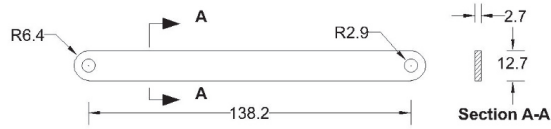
Details of Sidebars (all dimensions are in mm, steel plate gauge 12).
